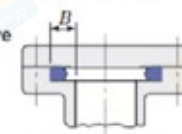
Fitting groove for static sealing of flat surface
